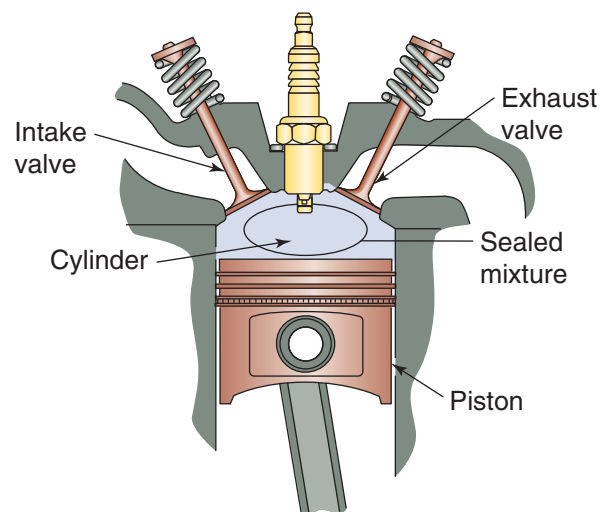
The intake and exhaust valves must seal tightly to prevent unwanted flow of gases.
